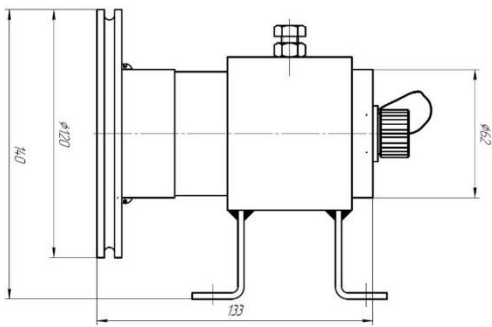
Overall drawing of the DPS-140(A) with sheave wheel
